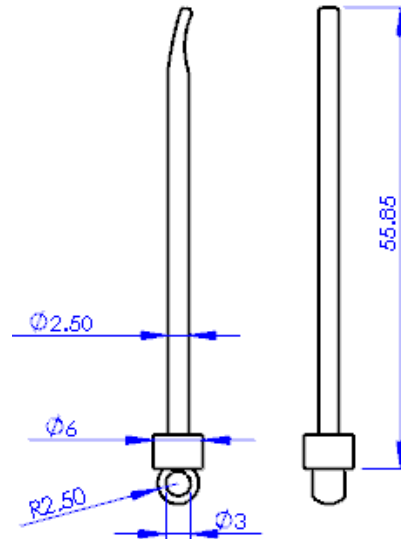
Diagram and dimensions of the Dr. Dabber Loading Tool. All dimensions are in mm.
